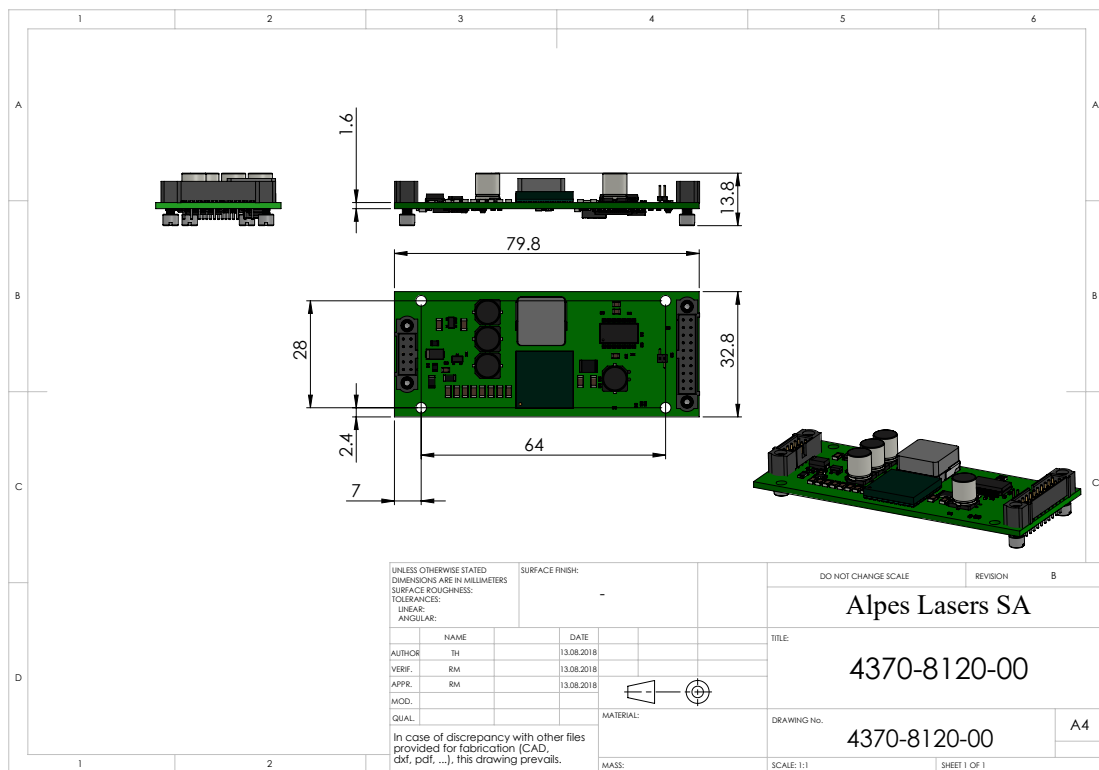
S-2m driver PCB. Through-hole spacing 64 mm.
